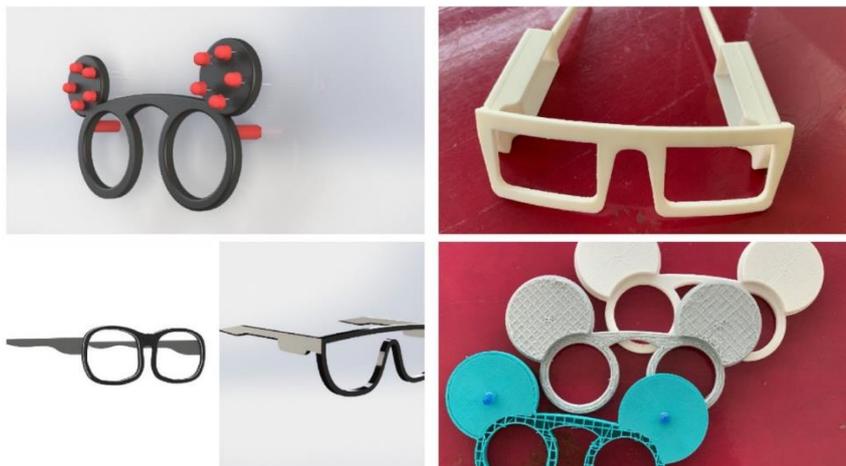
CAD designs of smart glasses and 3D printed prototypes
